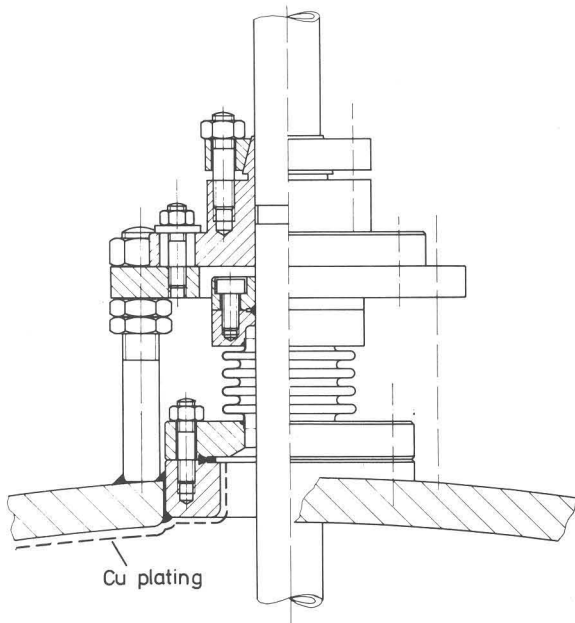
Stem head supported by a levelled plate. The stem can be adjusted in three dimensions and is sealed to the cavity by the bellow assembly clamped to the stem and bolted to the welded-in Con Flat flange.
